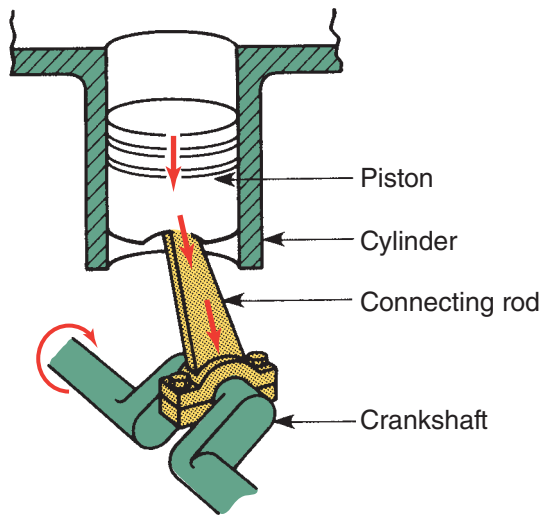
The engine's pistons fit tightly in the cylinders and are connected to the engine's crankshaft with connecting rods.
